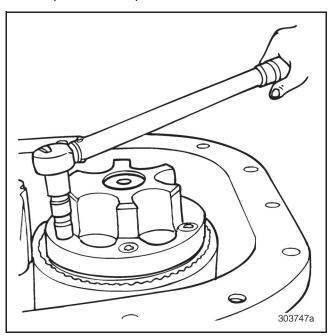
Installing Planet Pinion Gear Cage Capscrews
